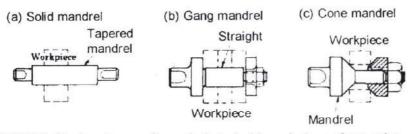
Various types of mandrels to hold workpieces for turning.
